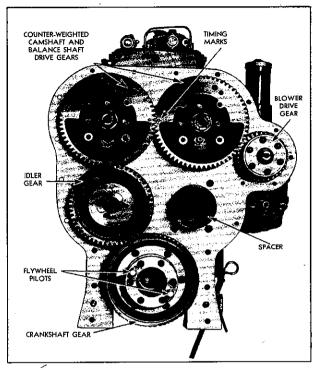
Gear Train and Timing Marks—Right-Hand Rotation Shown.
